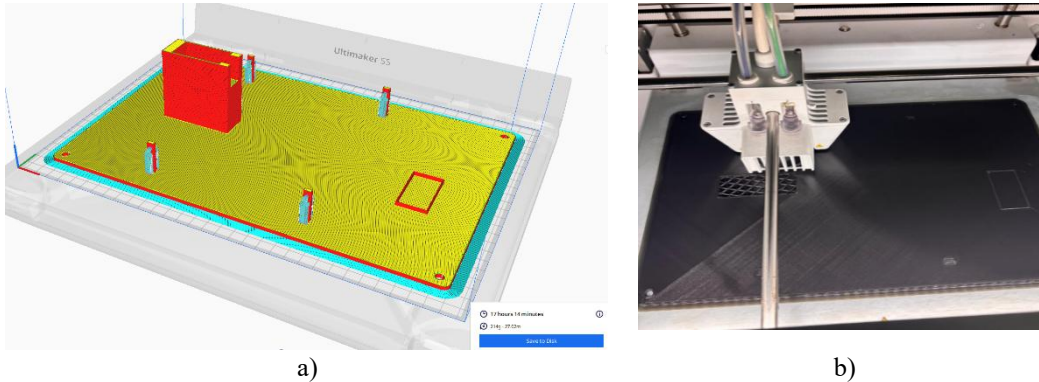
Chassis:: a) Part presentation in Ultimaker Cura, b) Chassis during the printing process
